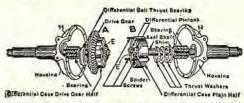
Illustrating how the differential case is divided into two parts (A) and (B), and which parts must be separated in order to remove the differential. The axle shafts are then removed from the gears (E). (A two-piece, or divided rear axle housing.)
